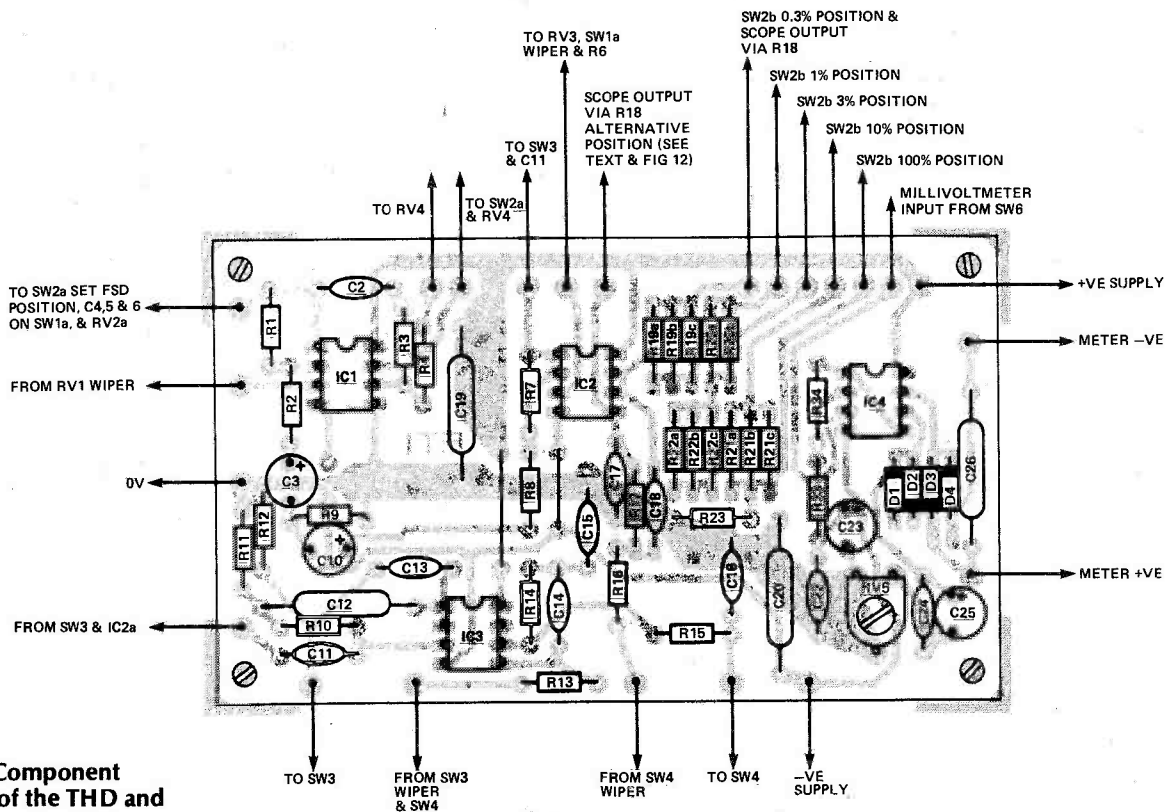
Component overlay of the THD and millivoltmeter PCB.
